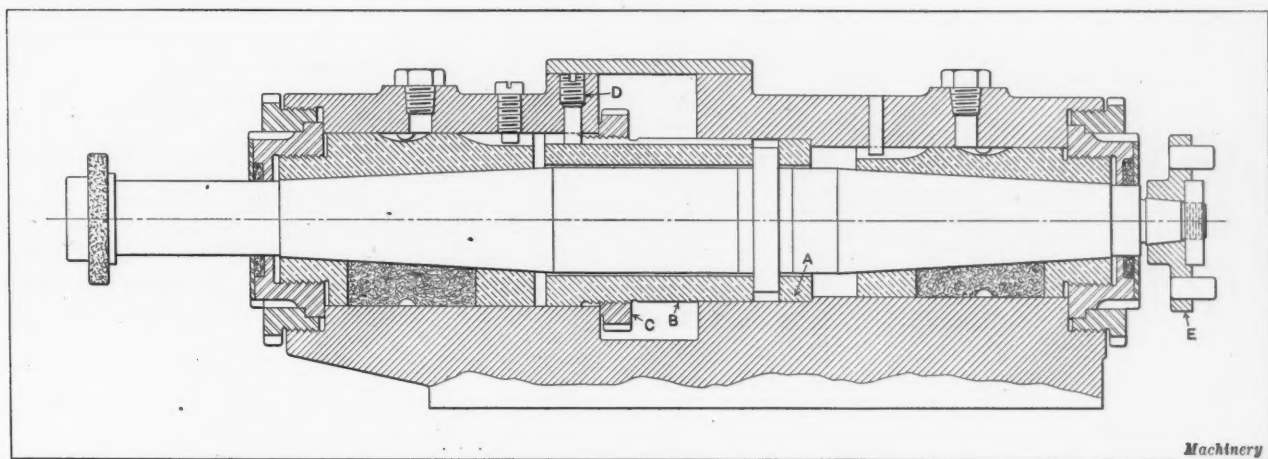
Grinding-wheel Spindle equipped with Adjustable Taper Bearings
